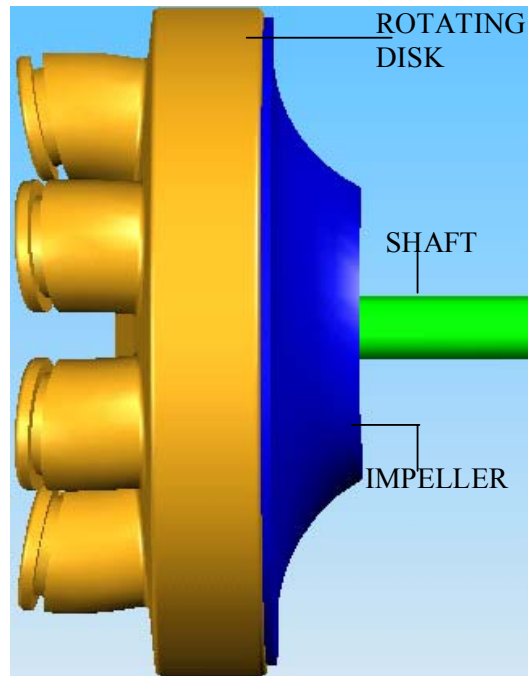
Impeller and the rotor at the suction side of the TurboPiston pump.
